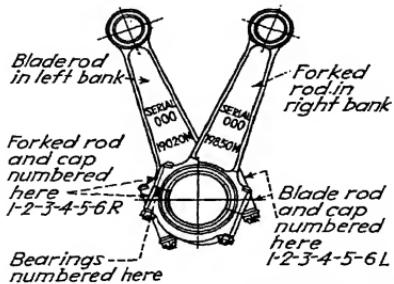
Identification numbers on the connecting rods, bearings, and caps.
